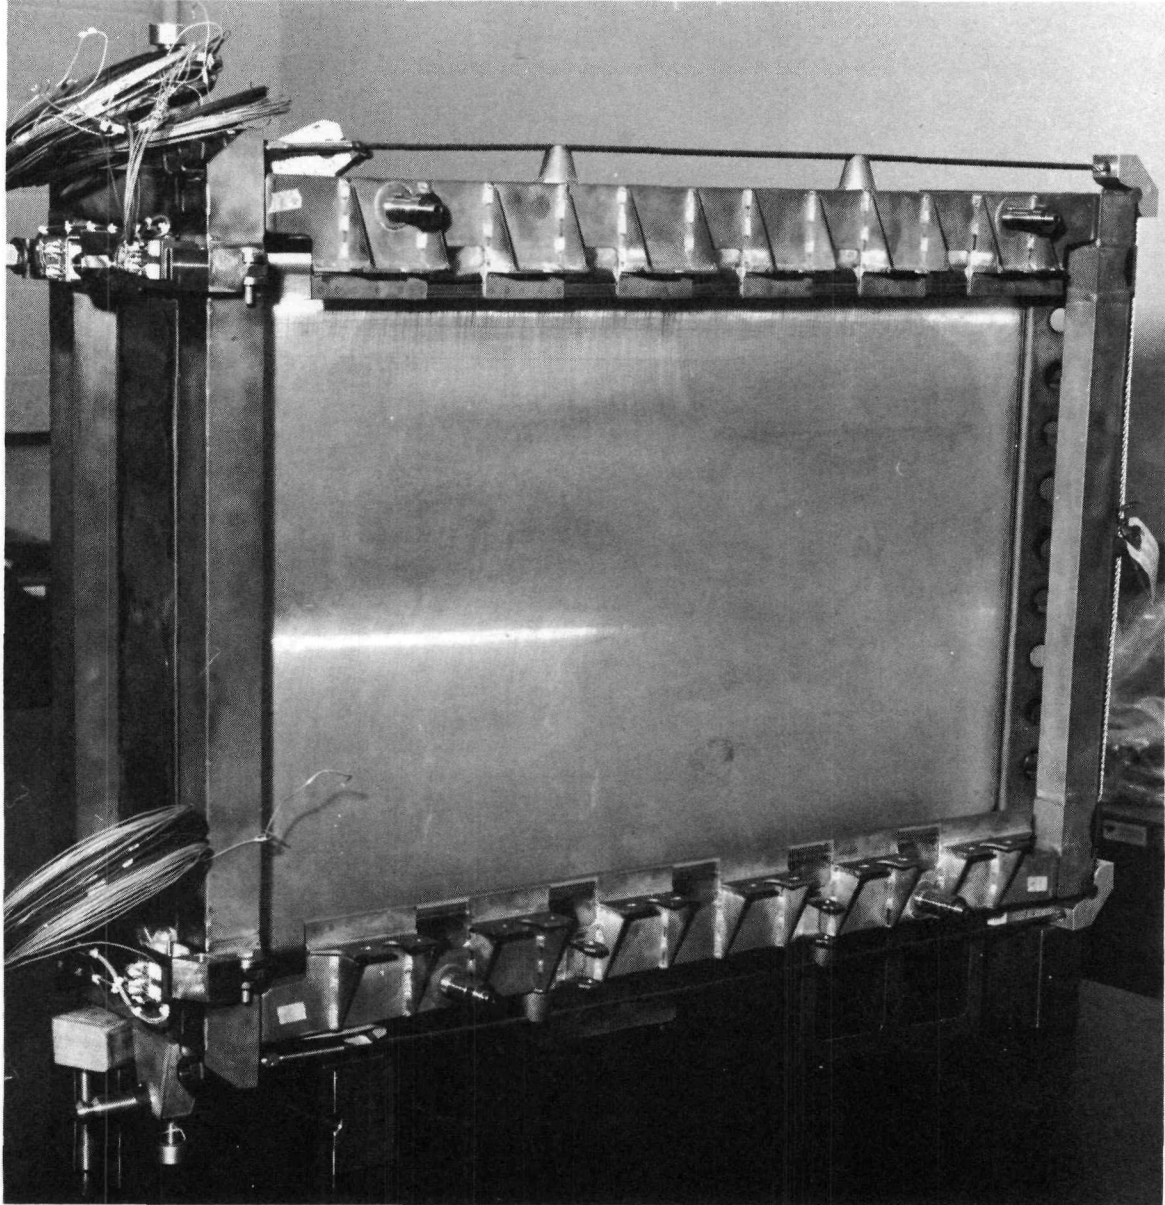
ASSEMBLED STRUCTURE FRAME WITH DUMMY ALUMINUM FUEL BLOCK
